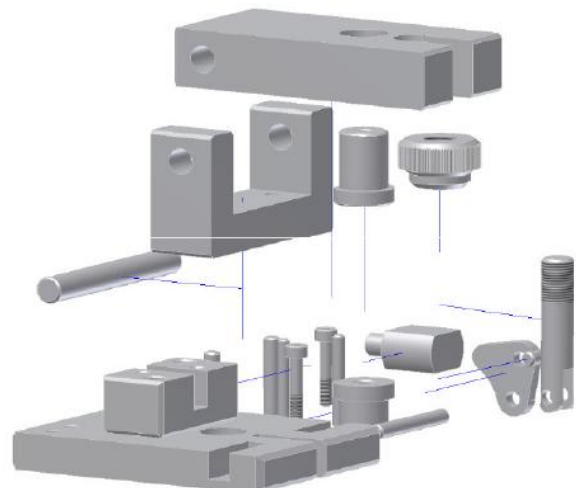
Solid Modeling of Leaf Jig-Exploded View
